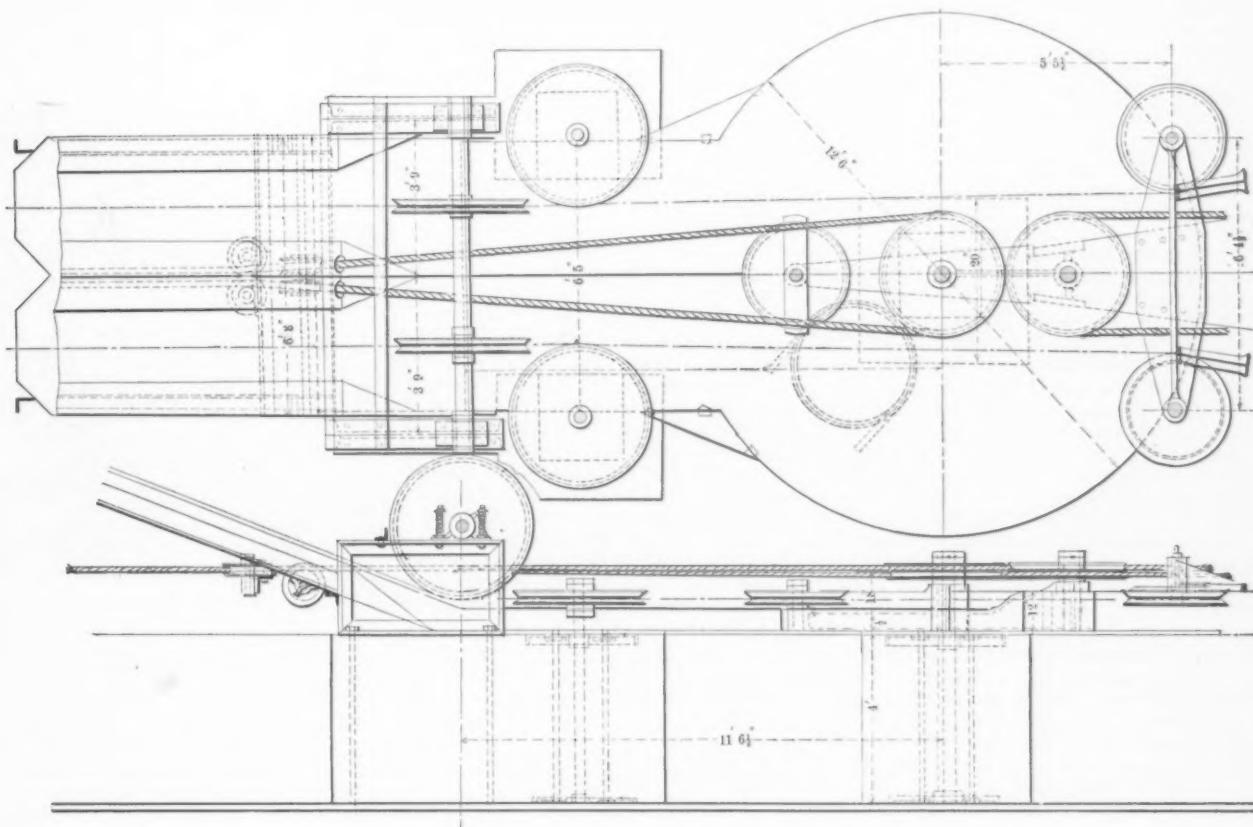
Sectional Plan and Elevation of Pivoted End of Reloader.
